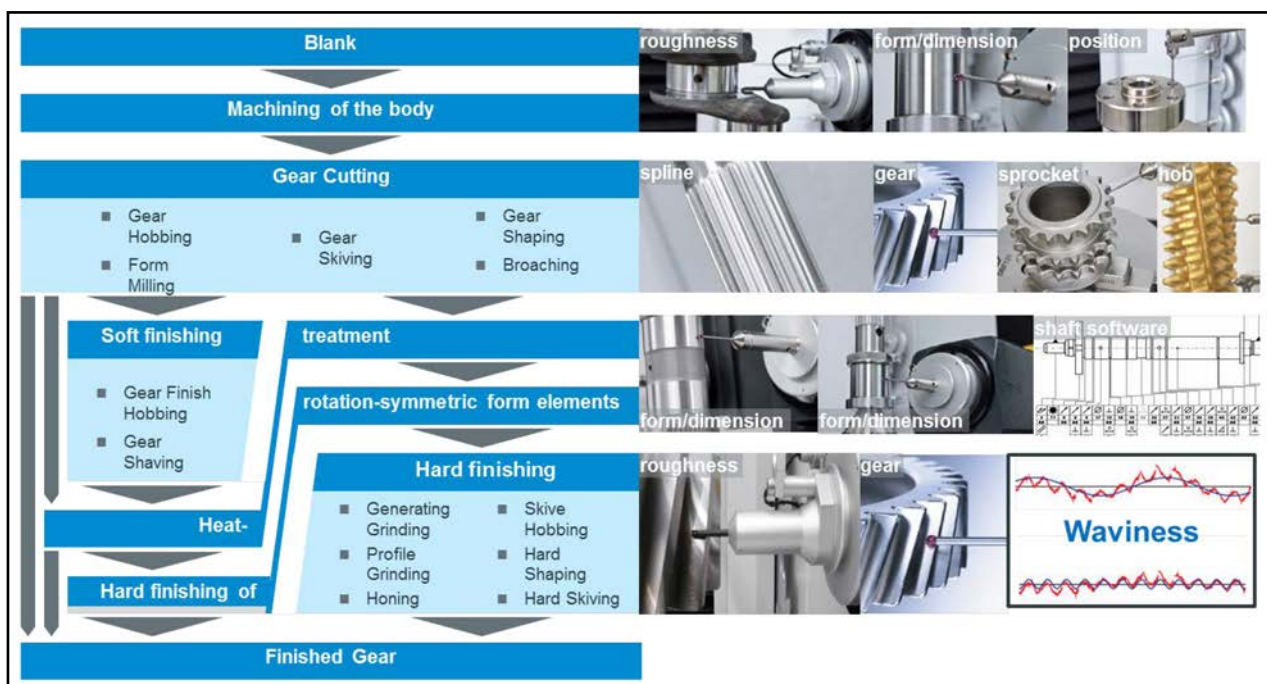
Measuring possibilities along the process chain of gear manufacturing.
